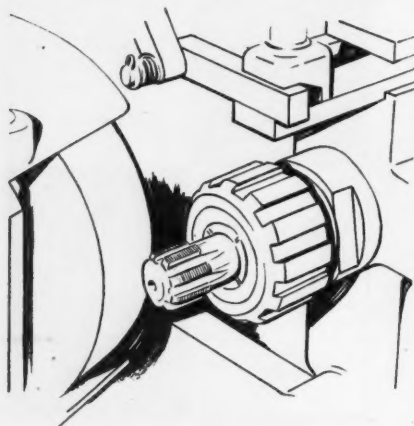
When taps cannot be held by the center holes for grinding, they can be held in special collets, as shown here.
